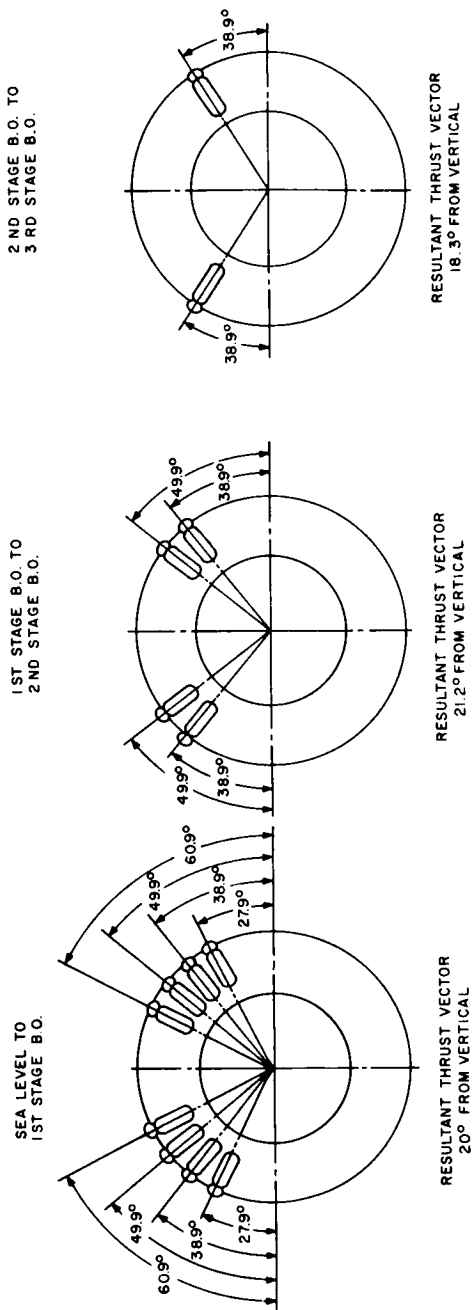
Mounting location of 8 EPD-310 abort motors, top view
